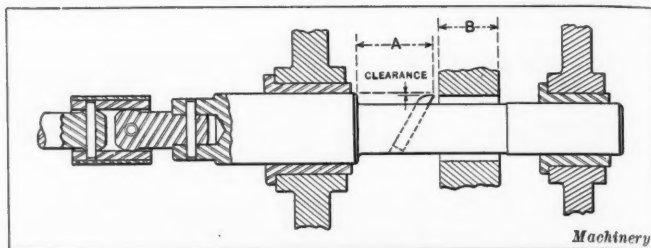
Boring-bar that may be removed from Fixture without disturbing Setting of Cutters
